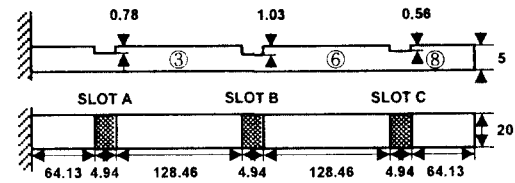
Geometry of a cantilevered beam specimen with three slots (units : mm)
